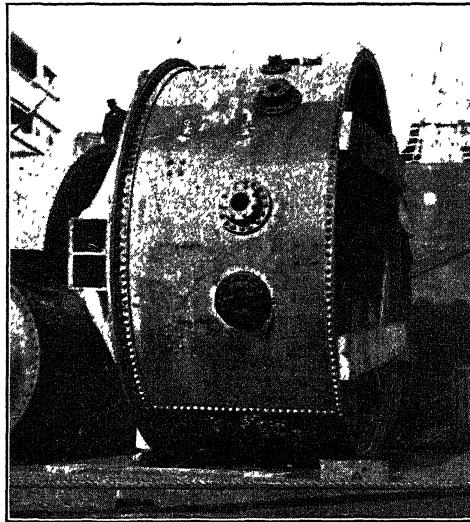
Another view of vacuum pan shown in Fig. 143, showing bracing.
